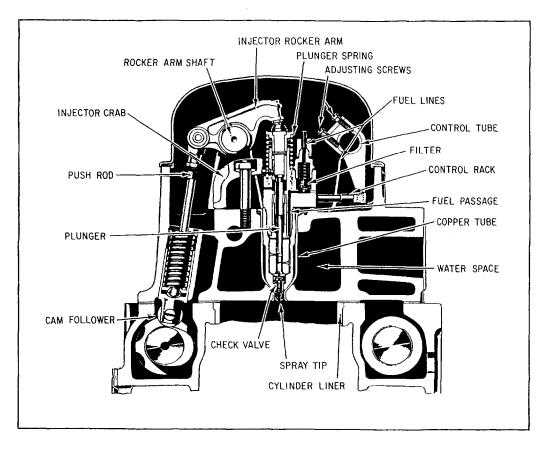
Mounting of the unit injector in the cylinder head.
